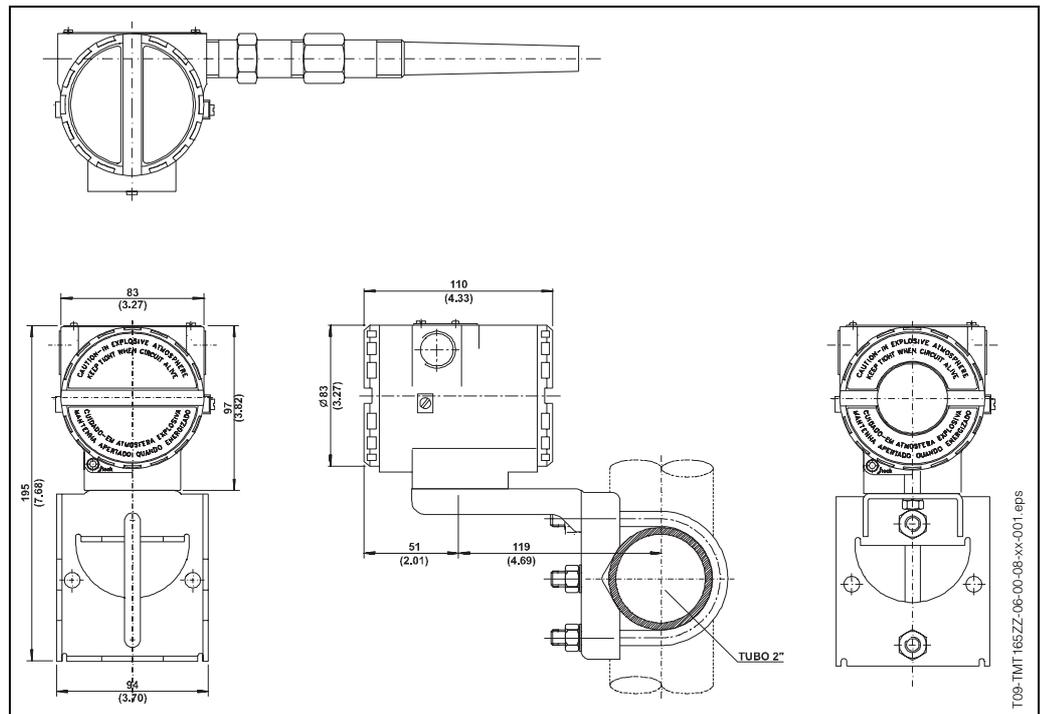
Field transmitter dimensions in mm (Inch)
